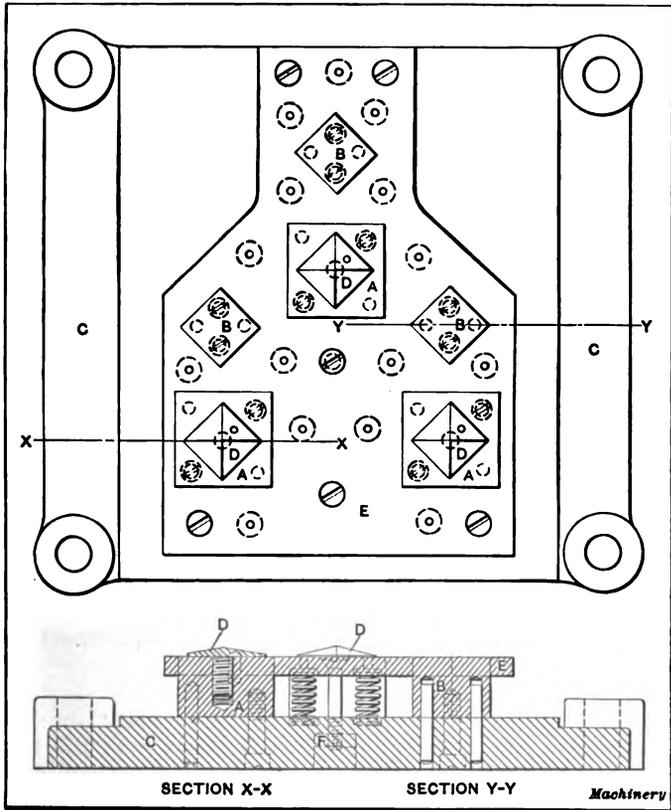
Plan and Sectional View of Blanking and Piercing Punch
